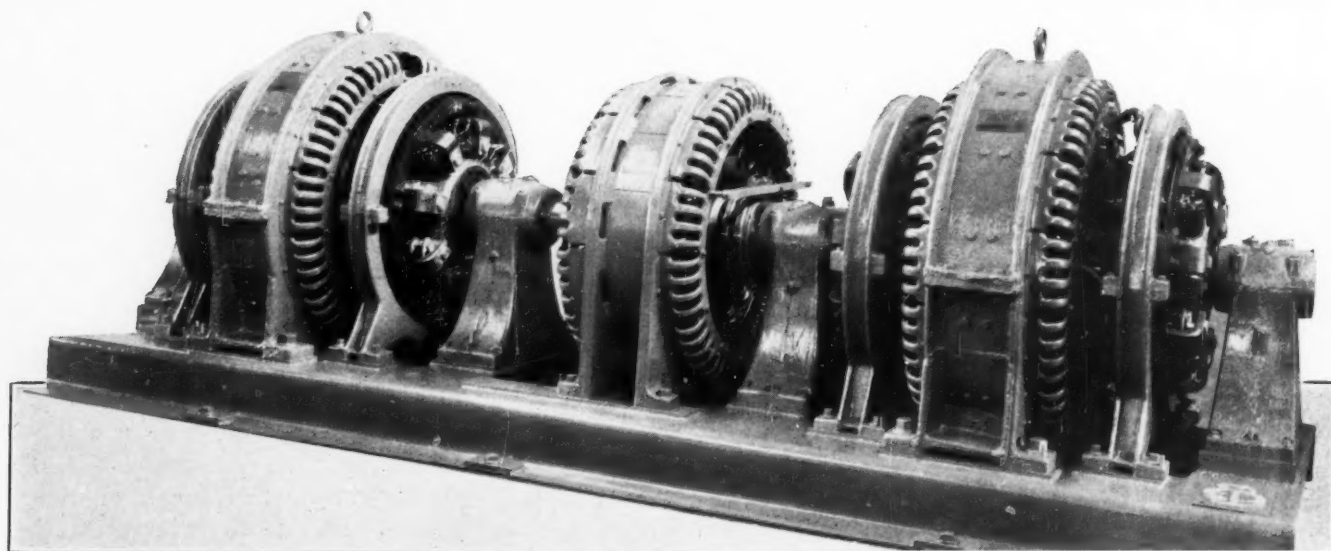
12,000-ampere chromium plating set mounted on welded steel plate base
